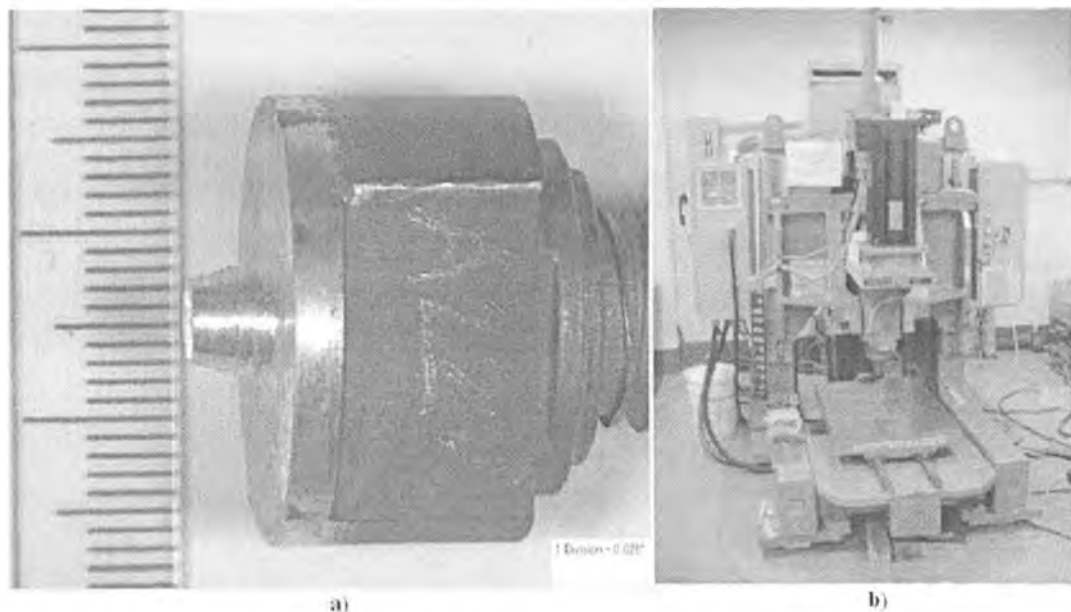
a) Image of A227 tool (scale shown in mm) and b) friction stir processing machine.
